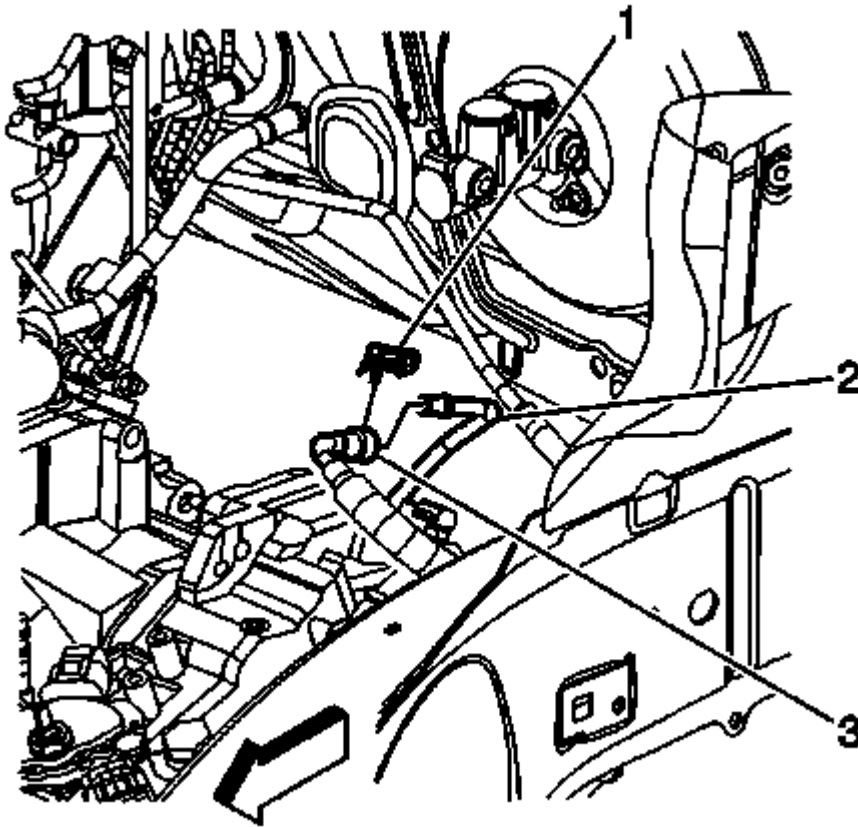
Disconnecting/Connecting Engine Fuel Hose/Pipe At Chassis Fuel Hose/Pipe
